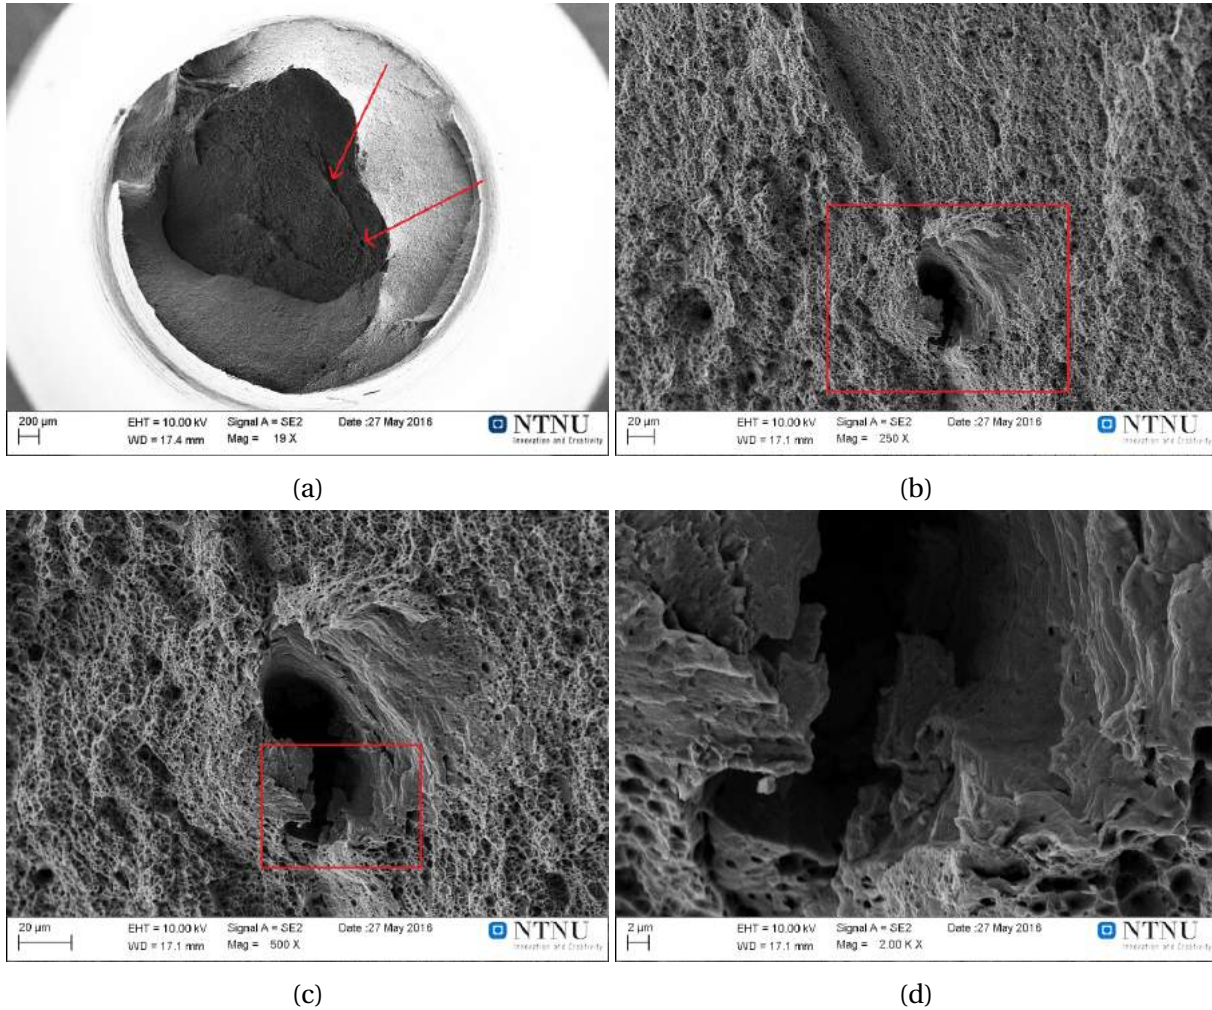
Fracture surface of screw extruded Al-5%Mg RS ribbons.
